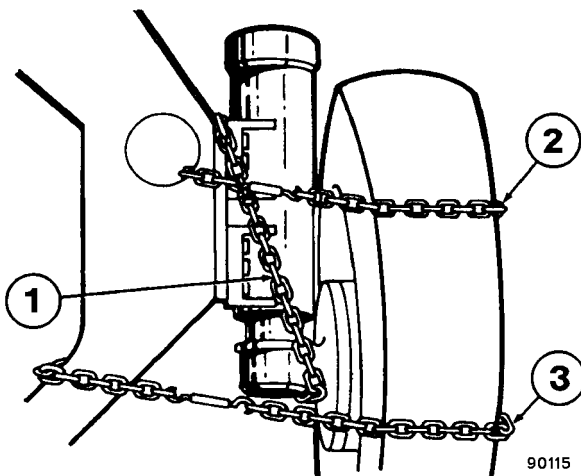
WHEEL SUPPORT CHAIN INSTALLATION
